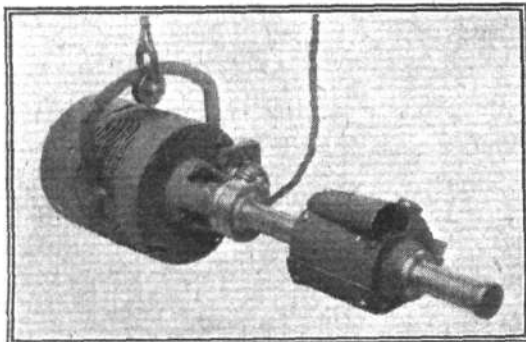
Motor drive. The funnel seen on top of the tool casing is for the ejection of chippings.
